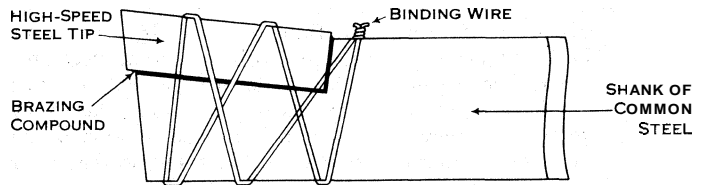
BRAZING A HIGH-SPEED STEEL TIP ONTO A LATHE TOOL
